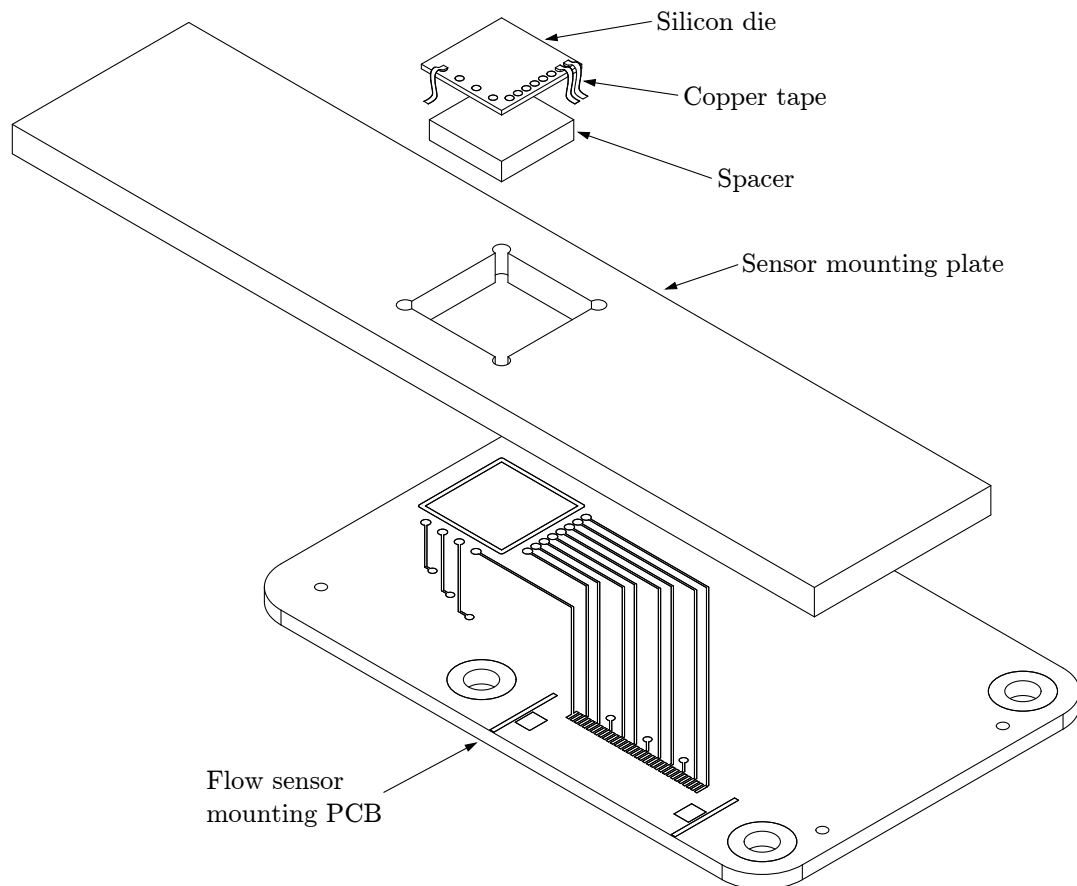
Exploded view of the sensor configuration in the flow channel experiment. A carrier PCB has a footprint for the sensor and pads with traces for making electrical connection to the sensors. The sensor mounting plate is secured to the top of the carrier PCB and fits snugly into a machined slot in the bottom of the flow channel. A spacer raises the silicon die up so the top surface sits flush with the top surface of the sensor mounting plate. Not shown is the copper tape which makes electrical contact between the pads on the silicon die and the pads on the carrier PCB.
